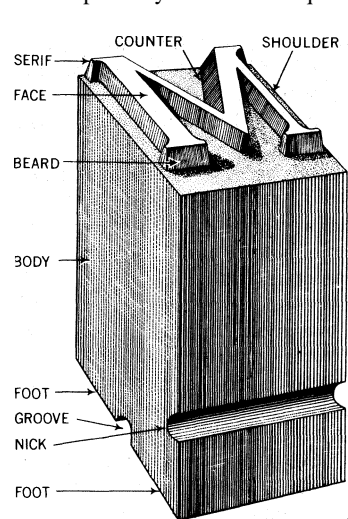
SINGLE PIECE OF TYPE USED IN HAND COMPOSITION
